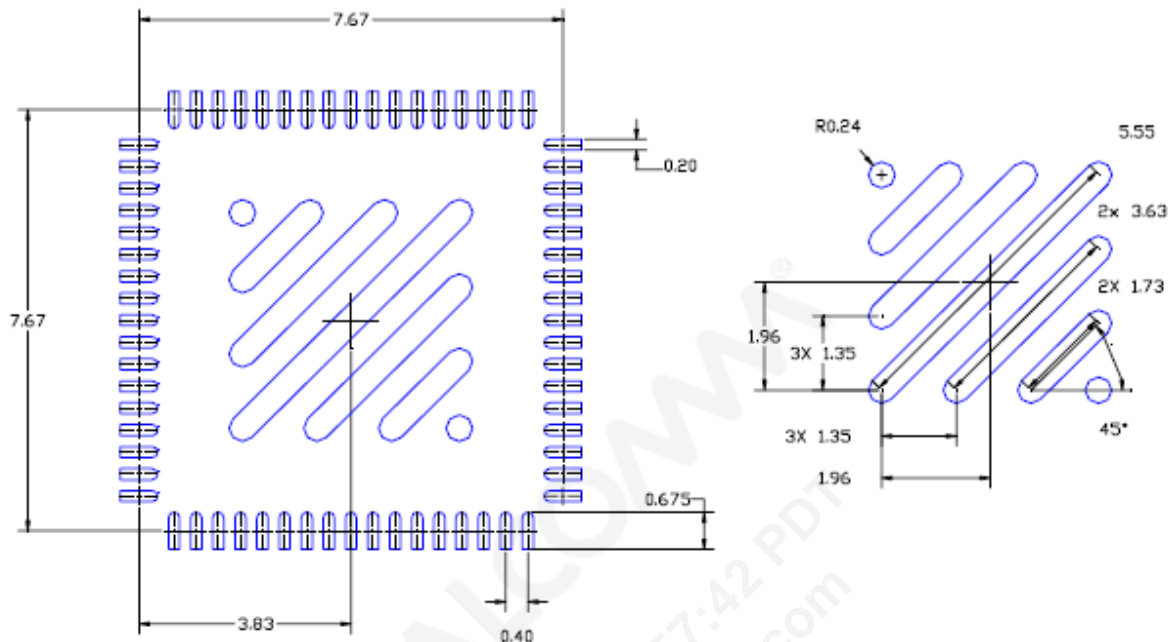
68 mQFN stencil pattern drawing with 127 μm stencil thickness
